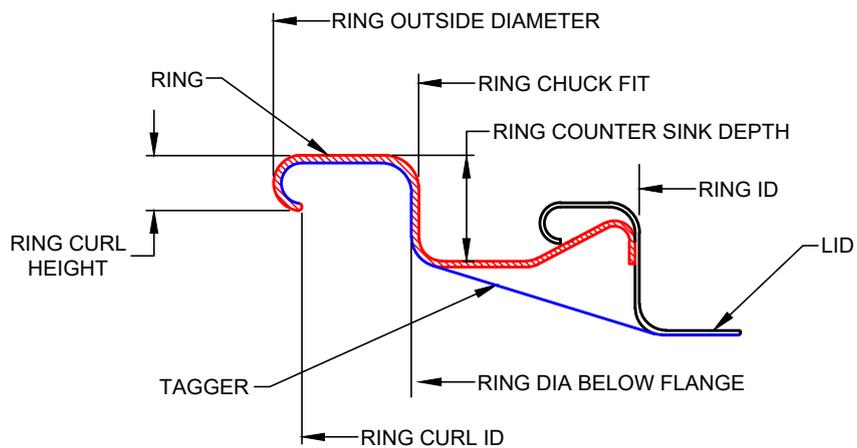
RLT ASSEMBLY DRAWING WITH SPECIFICATION PARAMETERS
